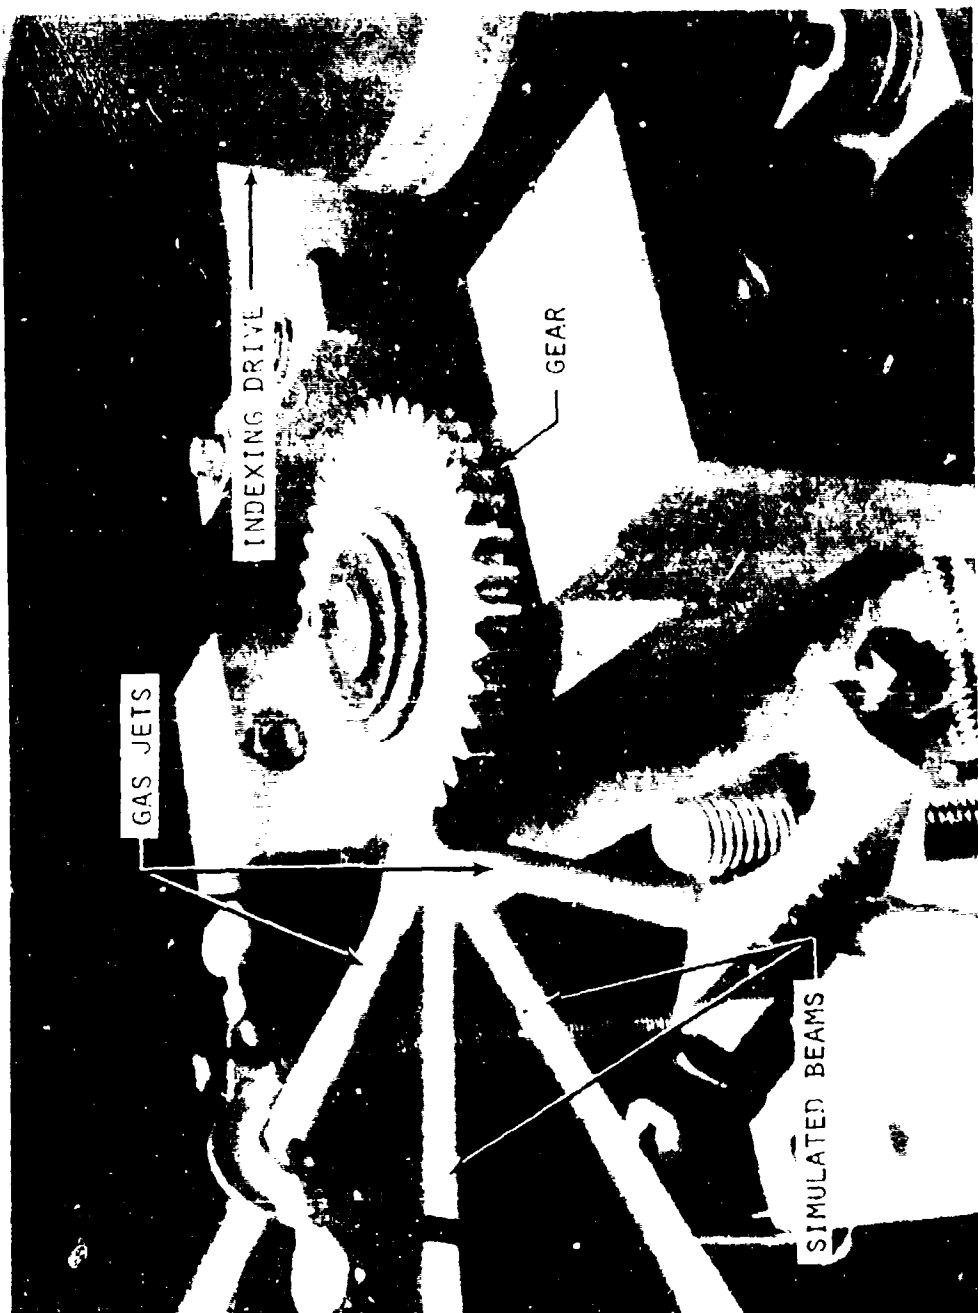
Close-up of gear on the workpiece positioner and simulated beams.
